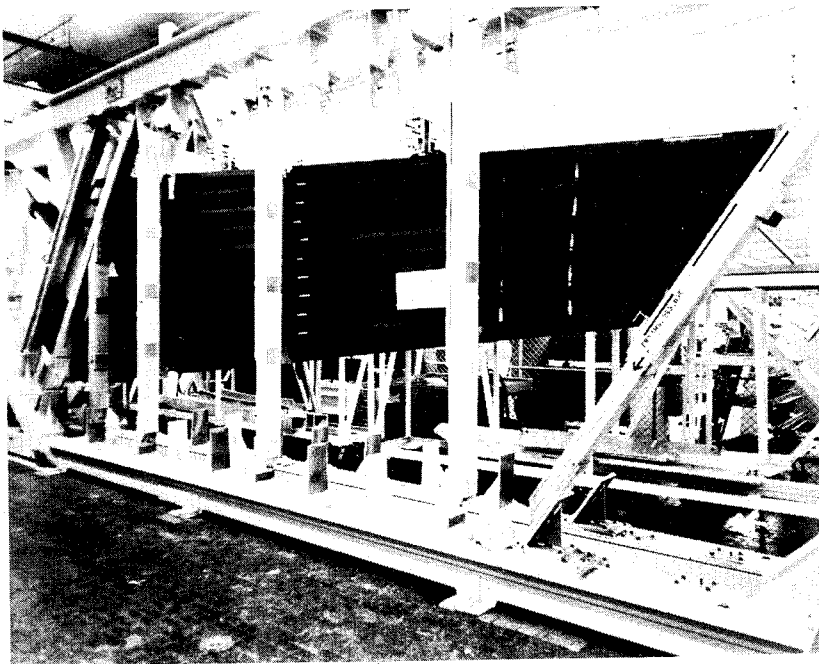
Static stabilizer assembly - substructure and lower cover.
